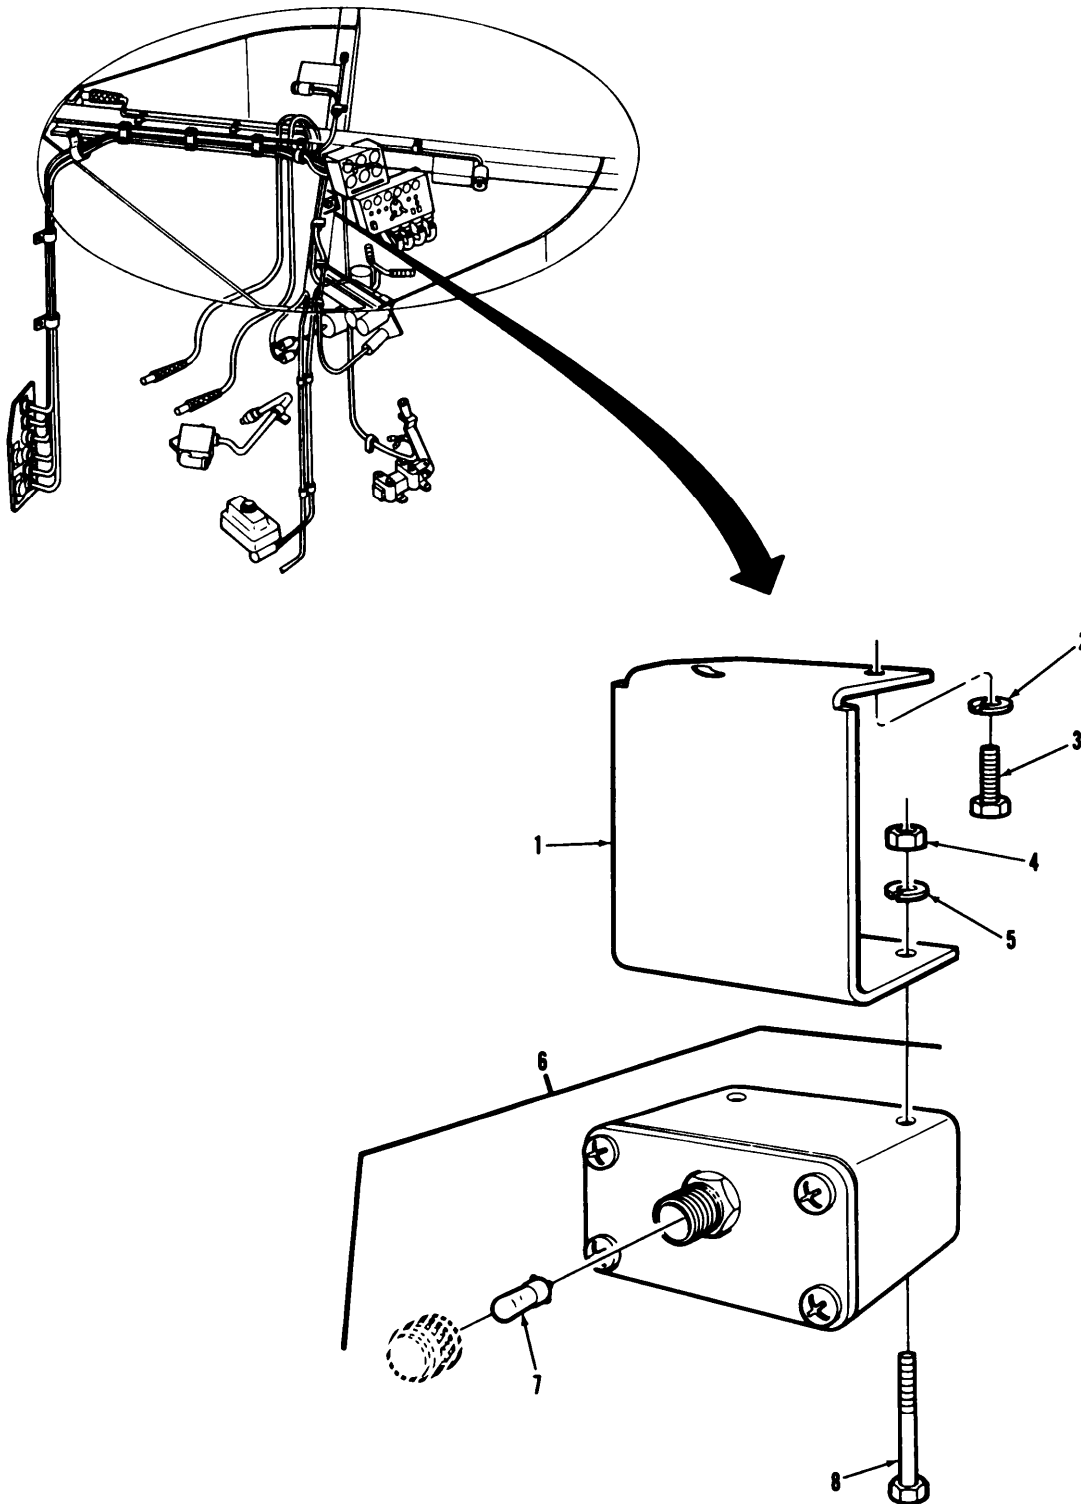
ENGINE AIR CLEANER DUST DETECTOR BOX ASSEMBLY AND RELATED PARTS (M48A5AVLB AND M60A1AVLB).
